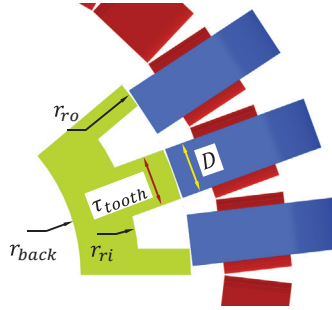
Description of the main dimensions HM3D machine 27/18.
